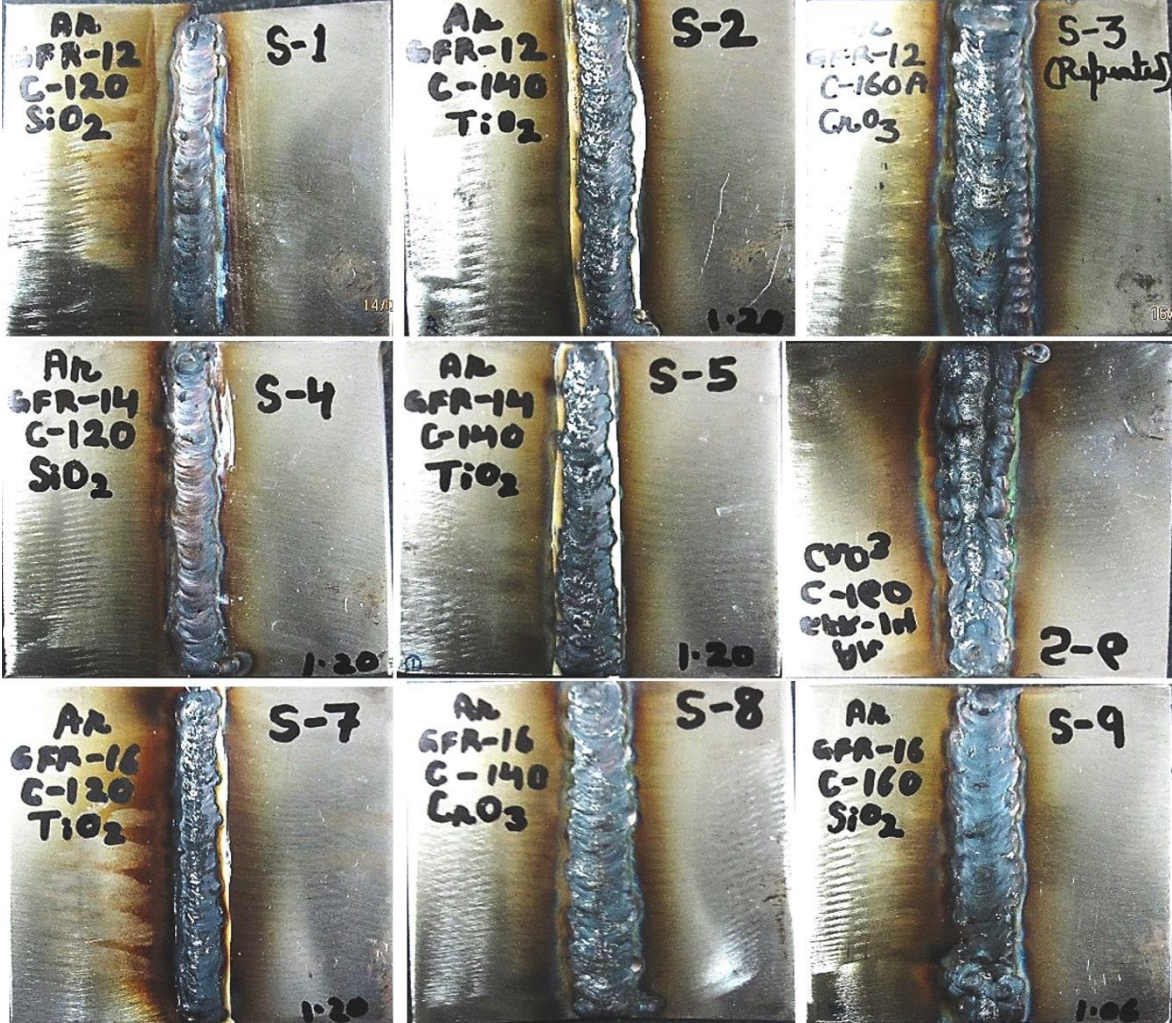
Weld bead appearance of Ar shielded weld coupon (S-1 to S-9)
